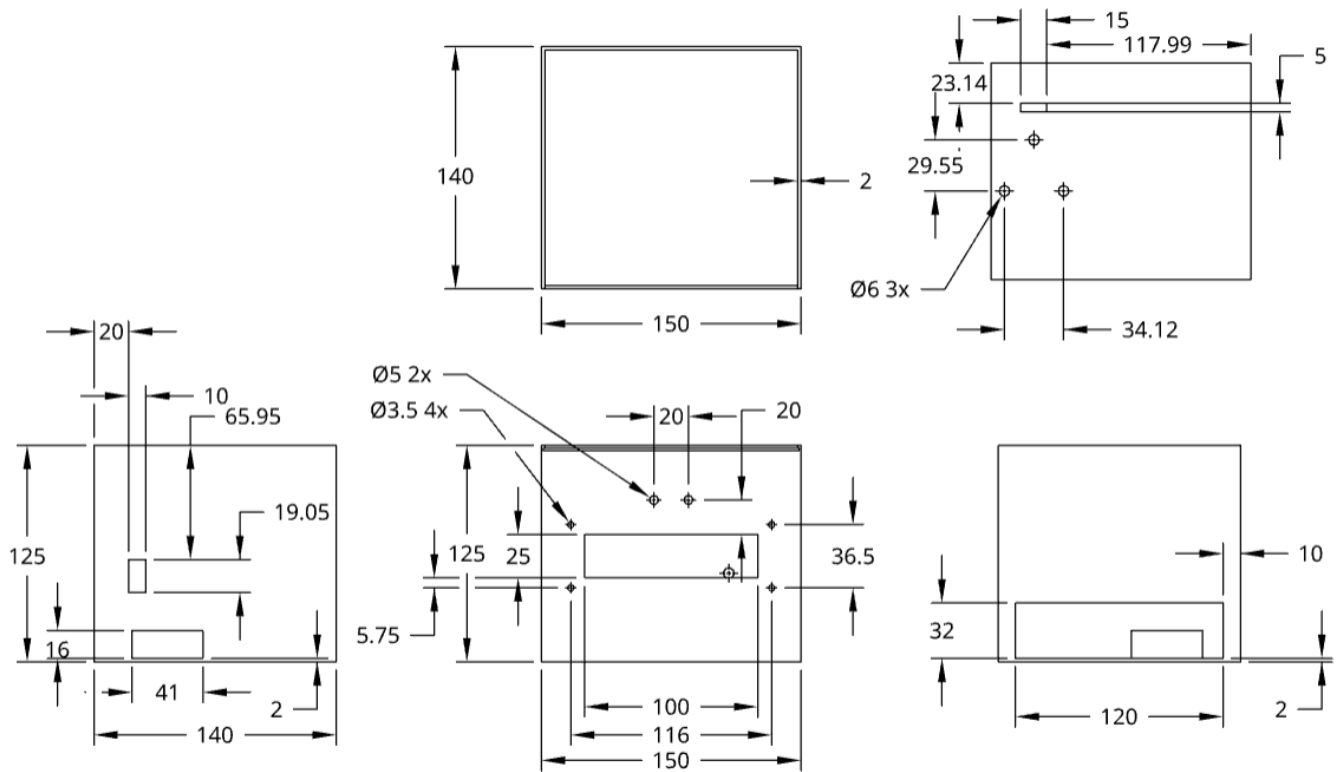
Engineering drawing for the housing, all dimensions are in millimeters. Left is left side, right is right side(sensor side), middle bottom is front, middle top is top view, and top right is back view(motor side).
